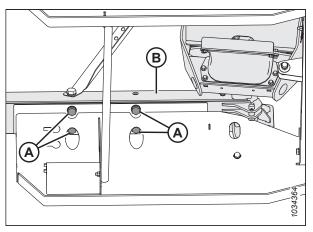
Caster Wheels Shipping Assembly – View from Under the Left Stand, Inboard
